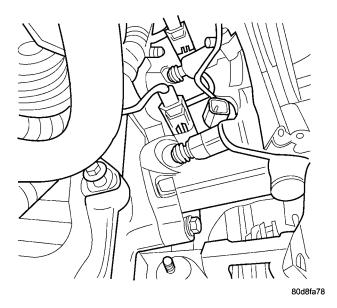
FUEL RAIL AND FUEL INJECTOR
